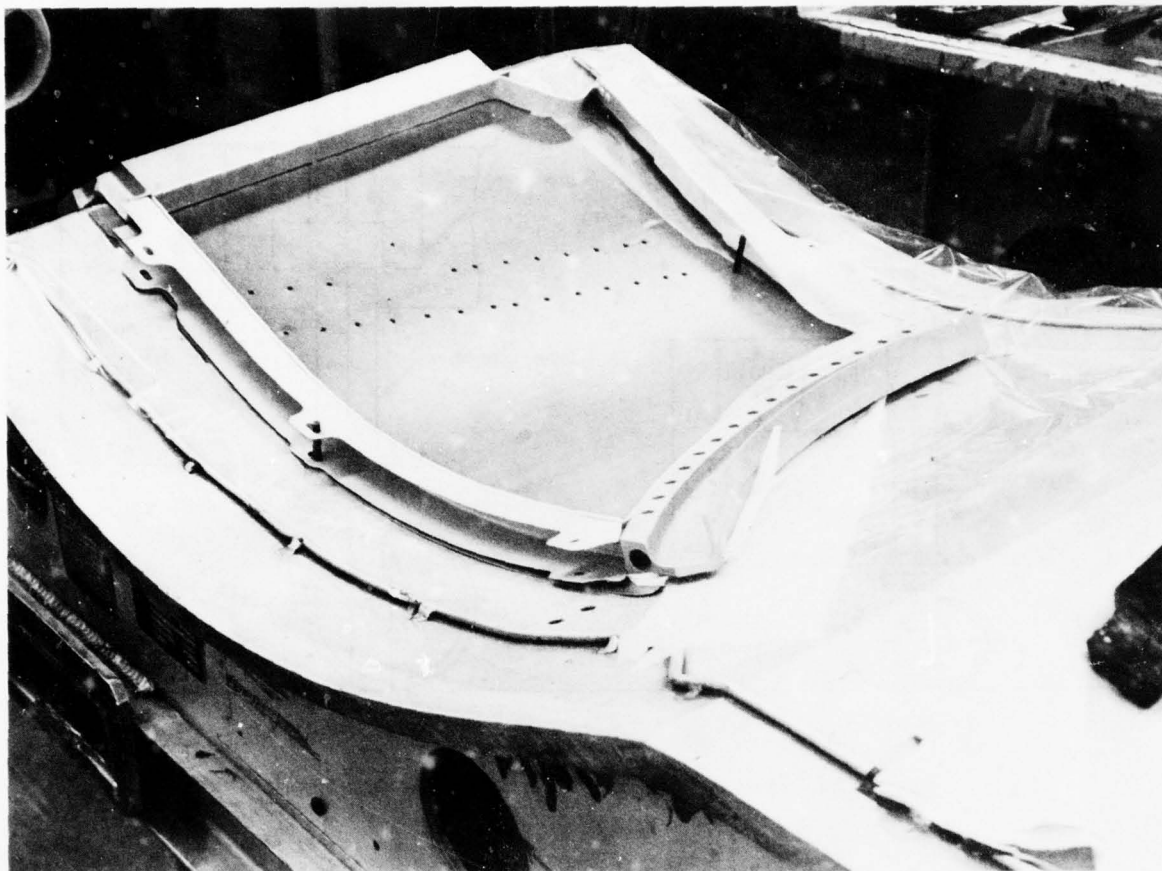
Welded Bonding Tool Showing Fork Lift Hole—Pinned Details in Place
